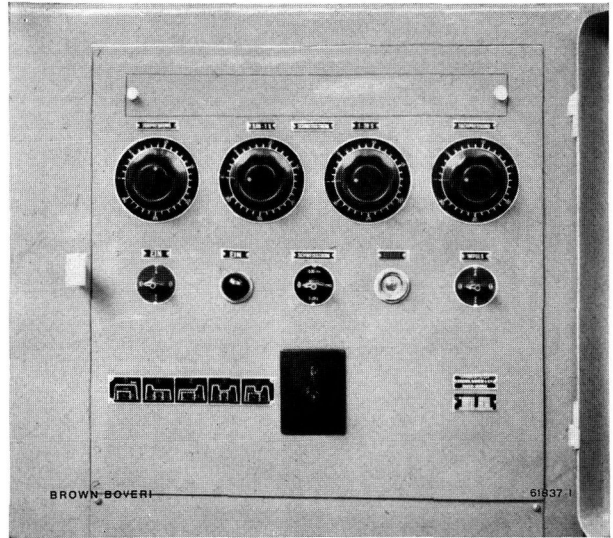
Switch panel for regulating the timing of the welding cycles in Fig. 84.
